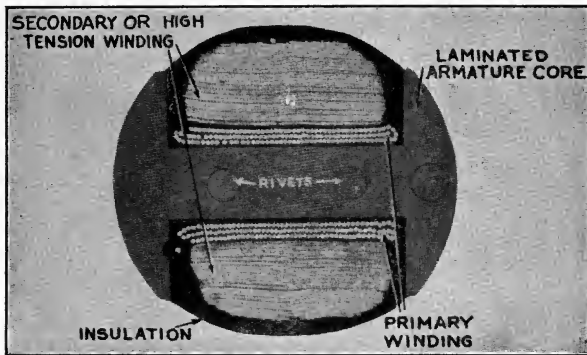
Cross sectional view of Bosch high-tension magneto armature.
